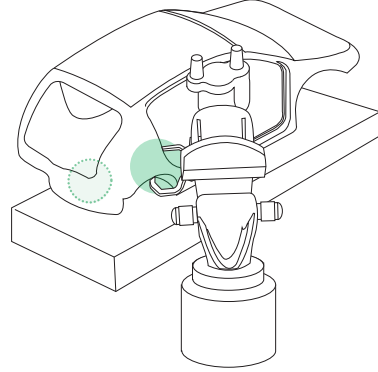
Robot performing a welding point in the back of the vehicle, before moving to a nearby welding point.
